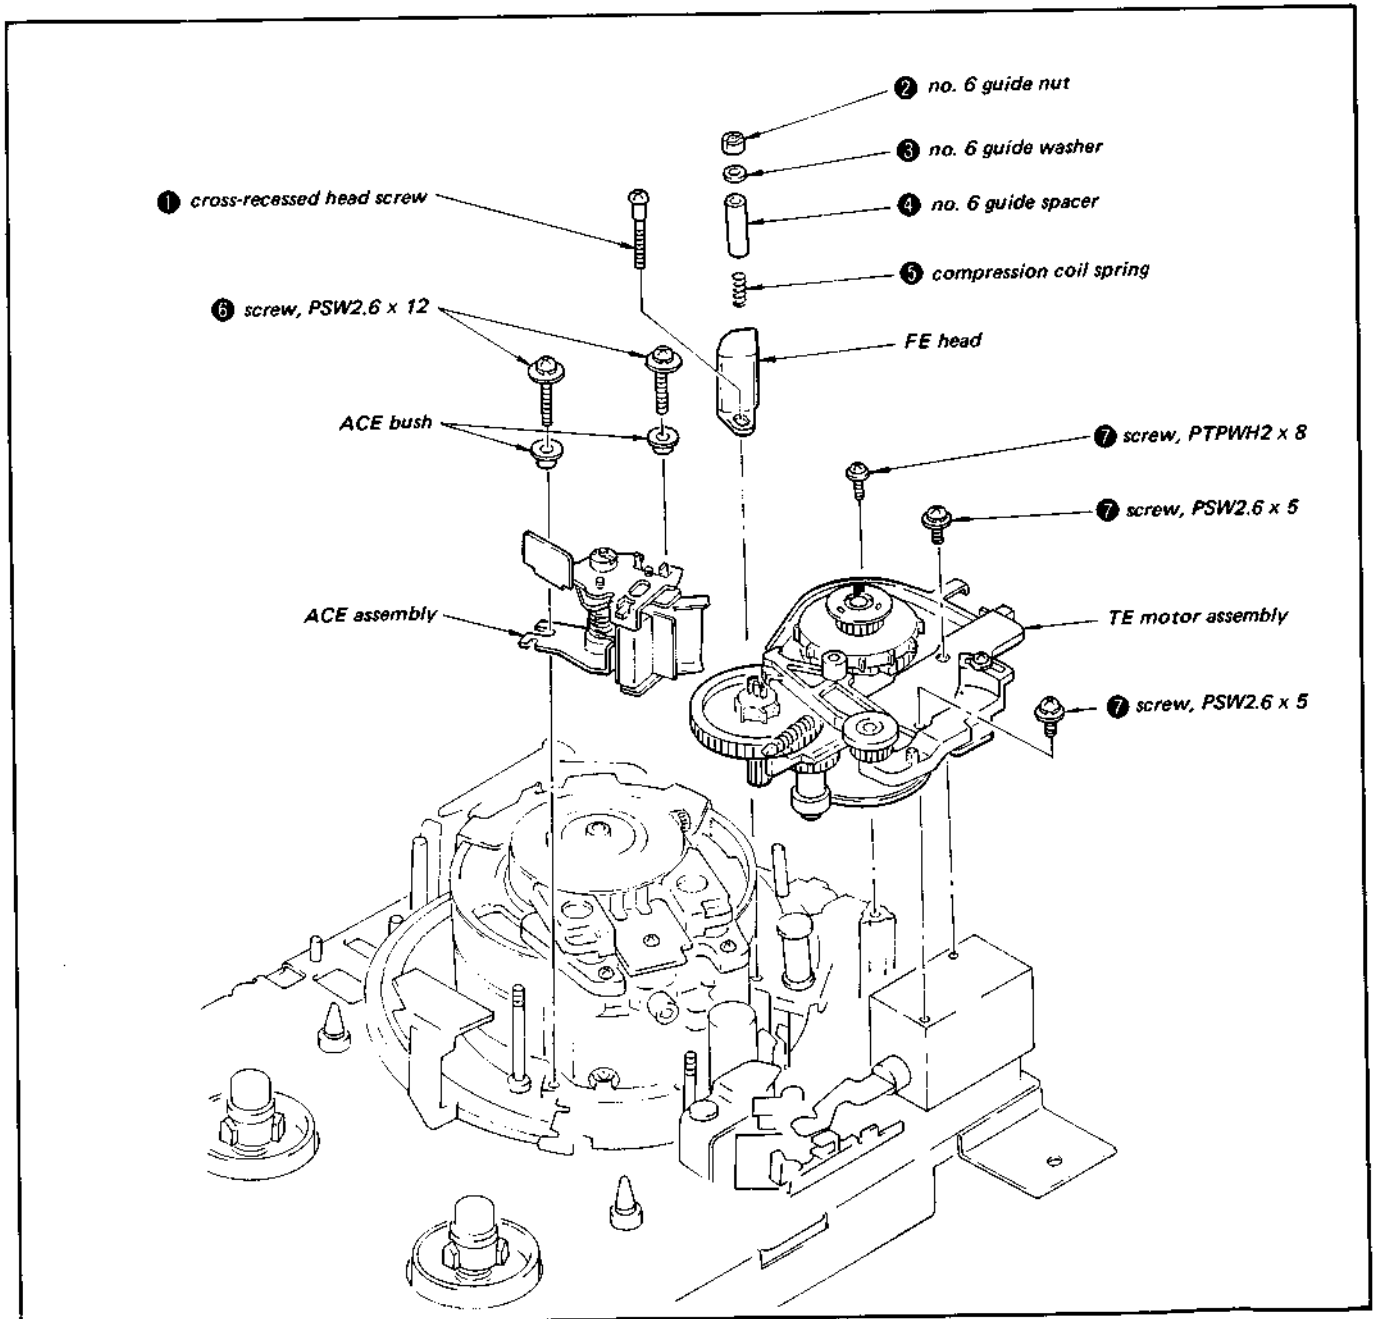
Removal of the ACE assembly, FE head and TE motor assembly.
